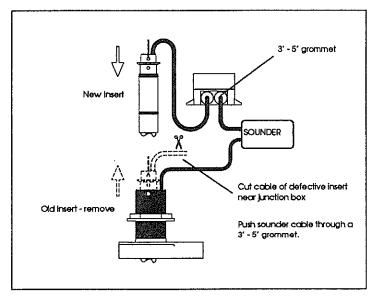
SPLICING CABLE IN TWO CABLE SYSTEM TO JOIN PRE-STRIPPED INSERT WIRES
